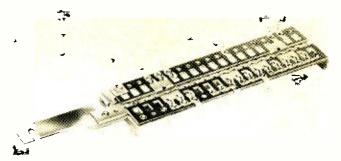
A 12-pole, 4-throw slide switch for printed boards
